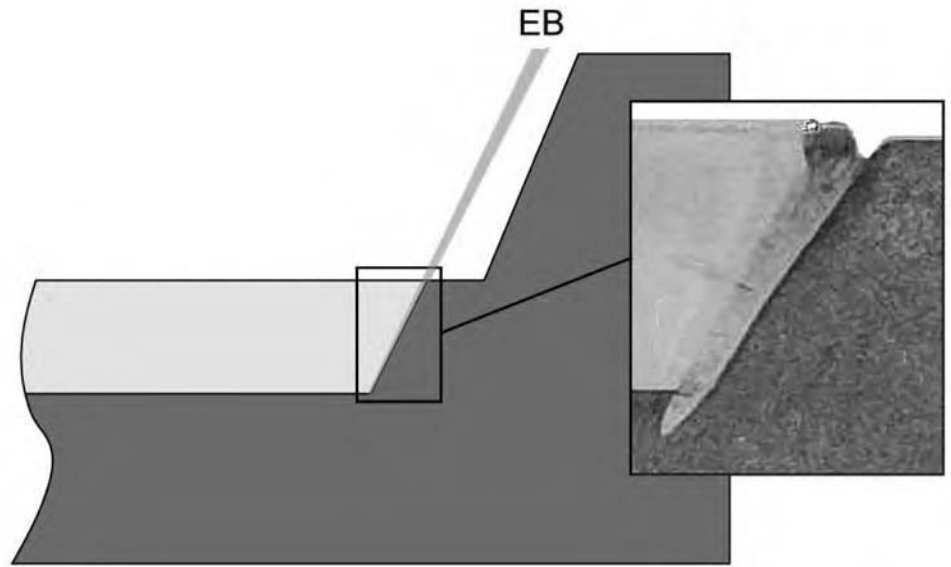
Gear welding segment showing joint angle. EB, electron beam. Courtesy of Sciaky, Inc.
